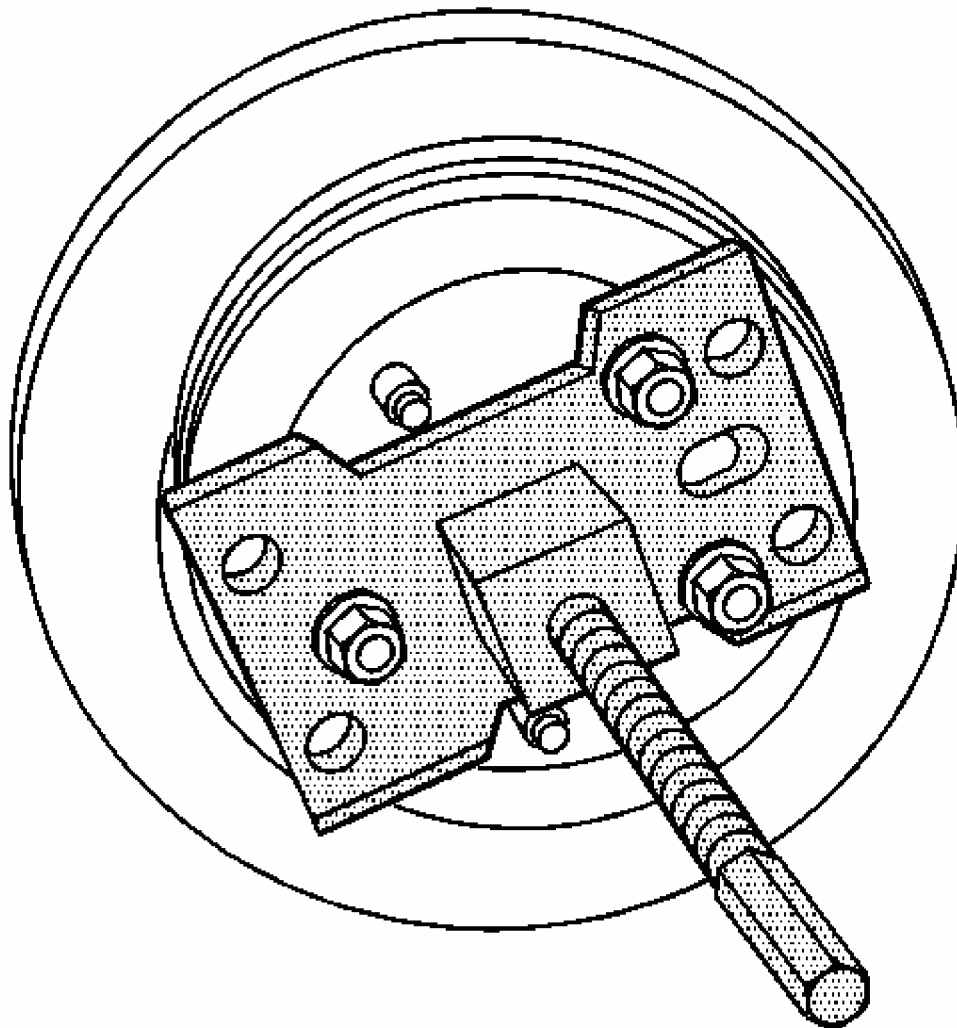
Using J45859 To Disengage The Wheel Driveshaft From The Hub
